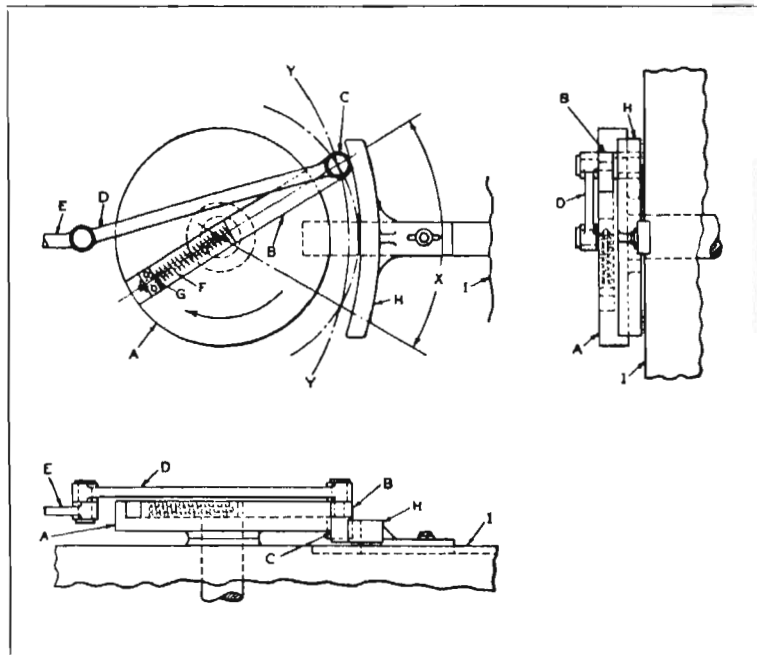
Crank Drive for Reciprocating Slide that Provides Dwell at One End of Stroke.
